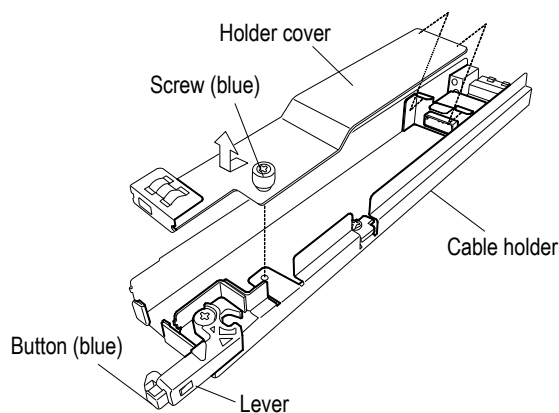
Removing the Cable Holder and the Holder Cover
